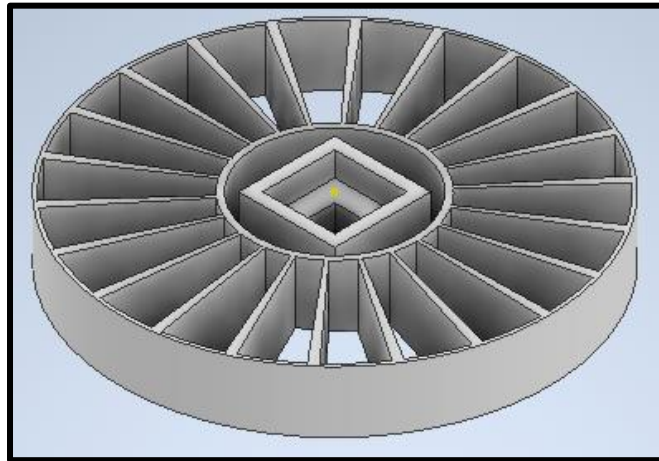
Rotating Capsule Piece (Bottom View)
